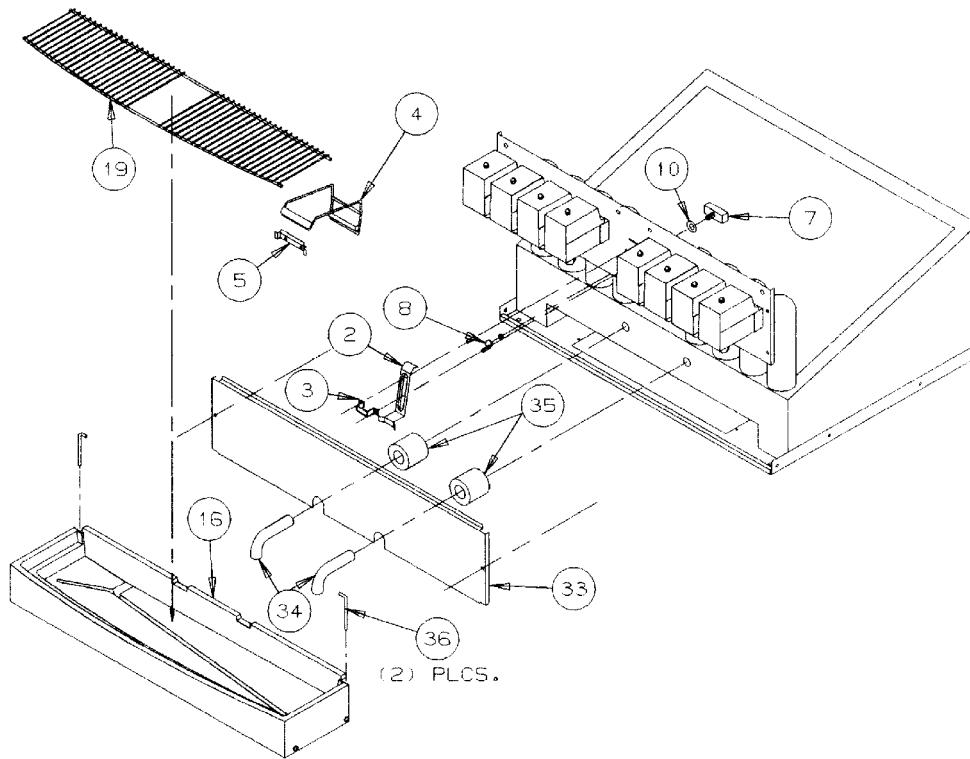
EXPLODED VIEW - LOWER SECTION AND PARTS LIST
